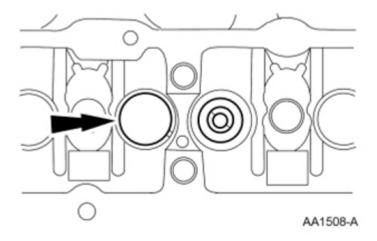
Locating Valve Tappets Courtesy of FORD MOTOR CO.
